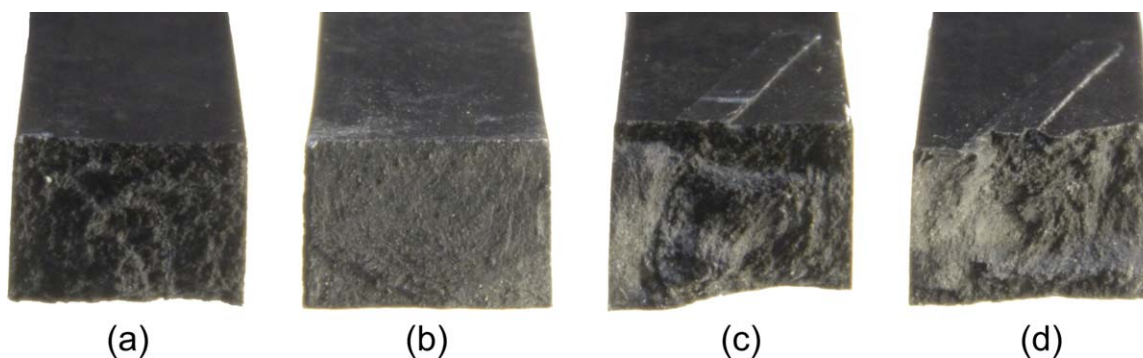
shows photographs of the fracture surfaces for the different specimen types and test configurations. Though only one broken specimen of each type is shown, all the other specimens tested looked exactly the same. The fracture surface of a flawless specimen [Figure 10(a)] is rather rugged, and looks as if it has consumed a lot of energy in being torn apart. Everywhere in the specimen the fibers are oriented on the long axis
